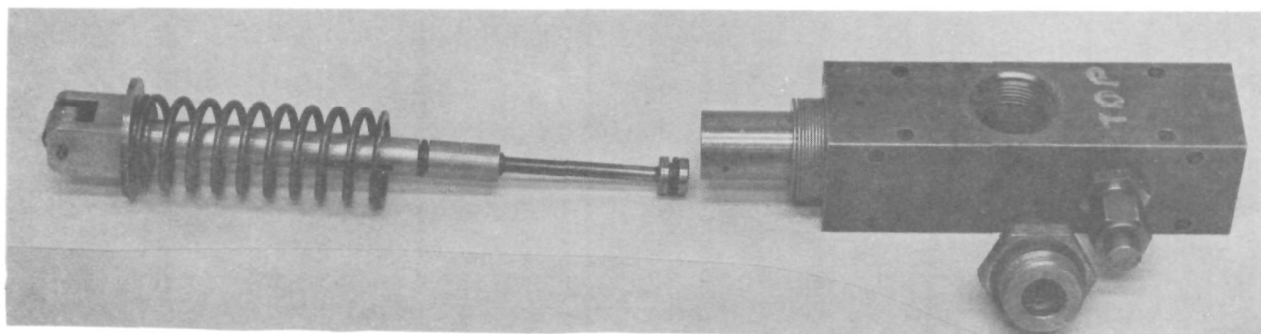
COMPONENT PARTS OF THE WATER METERING VALVE
